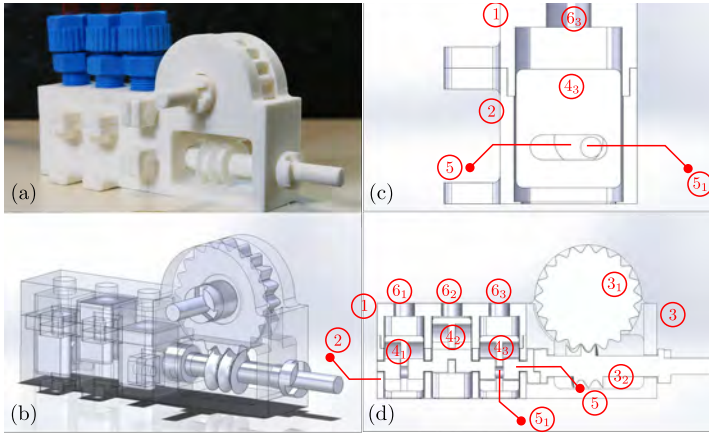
(a) A 3D printed prototype of the PneuAct actuator. (b) Components: ① cylinder head, ② cylinder, ③ reduction gear-head, ③₁ pinion gear, ③₂ worm gear, ④ pistons, ⑤ crankshaft, ⑥_{*i*} (*i* = 1, 2, 3) inlets. (c) A transverse cross-section of the motor passing through piston ④₃ and crank-pin ⑤₁. The crank-pin slides in the horizontal slot in the piston stem, converting the reciprocating motion to rotation (scotch yoke mechanism) (d) A longitudinal cross-section of the motor illustrating the intermeshing mechanism between the crankshaft, the pistons, and the worm drive.
